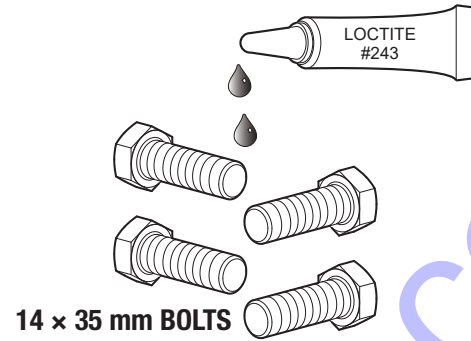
Applying Loctite® 243™ (Front Cover Bolts)
